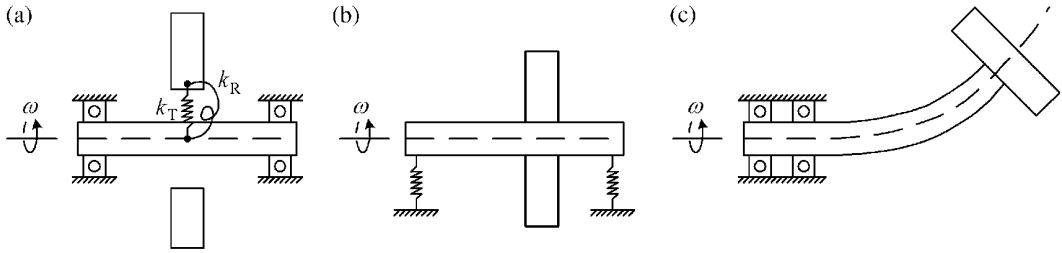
Elastic restraints on a spinning disk (a) rigid shaft and bearing and flexible disk attachment, (b) rigid shaft and flexible bearings, and (c) rigid bearings and flexible shaft
